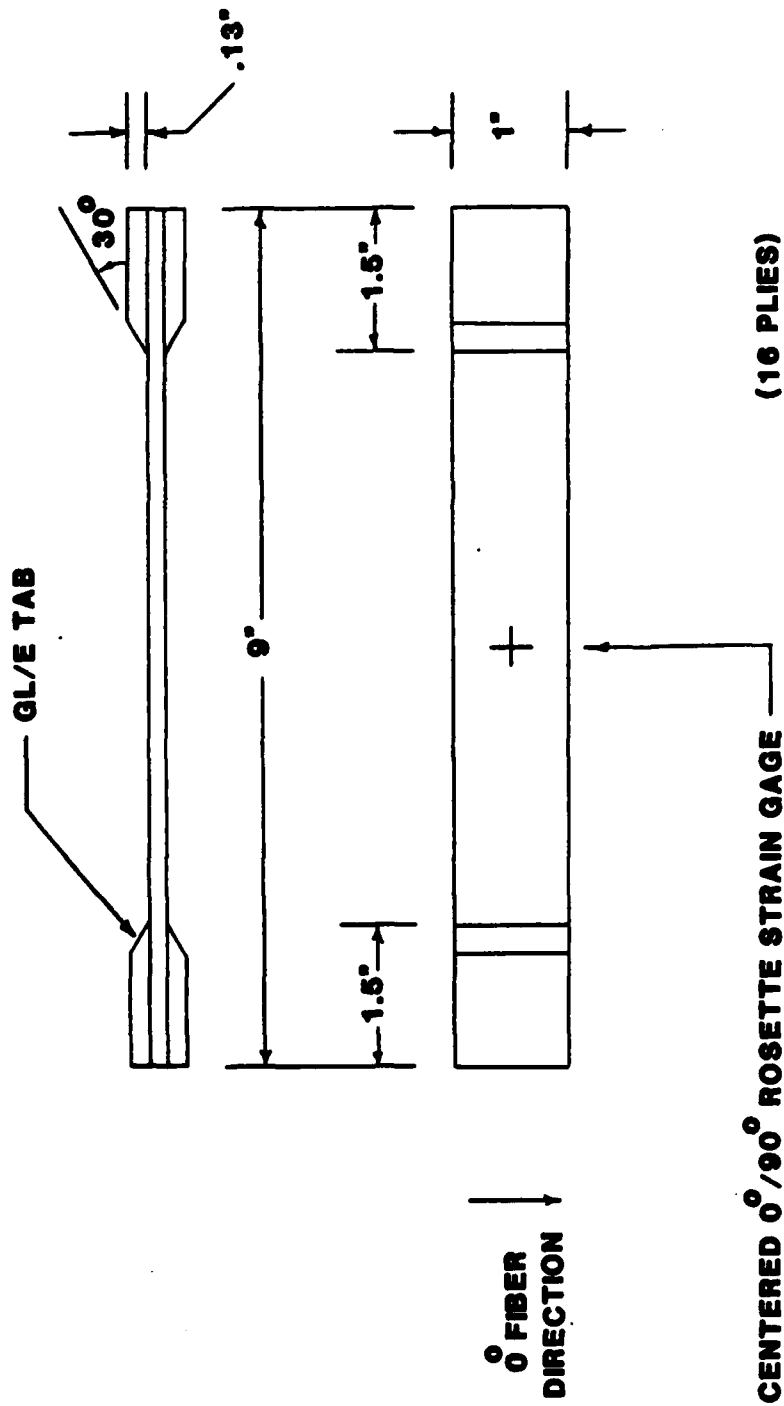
TRANSVERSE TENSION SPECIMEN.
